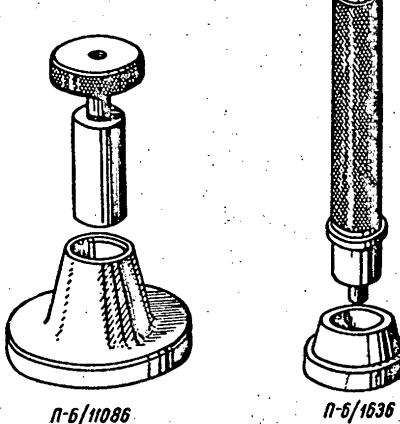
DEVICE FOR PRESSING IN AND OUT VALVE LEATHER BEARING
